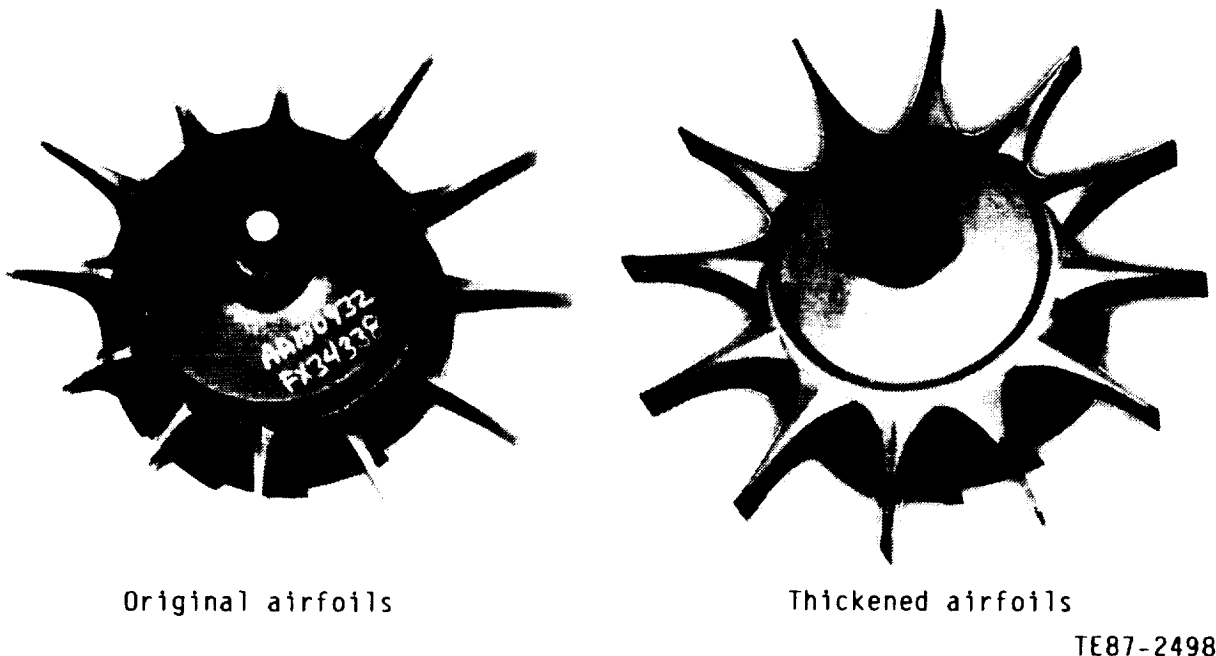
Sohio injection-molded SiC gasifier turbine rotors.
